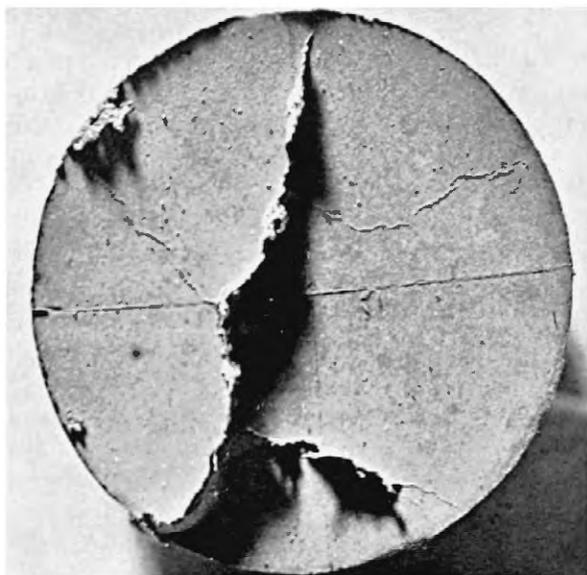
Fins on the surface of a casting that formed as a result of cracks in the investment before casting of the metal.
